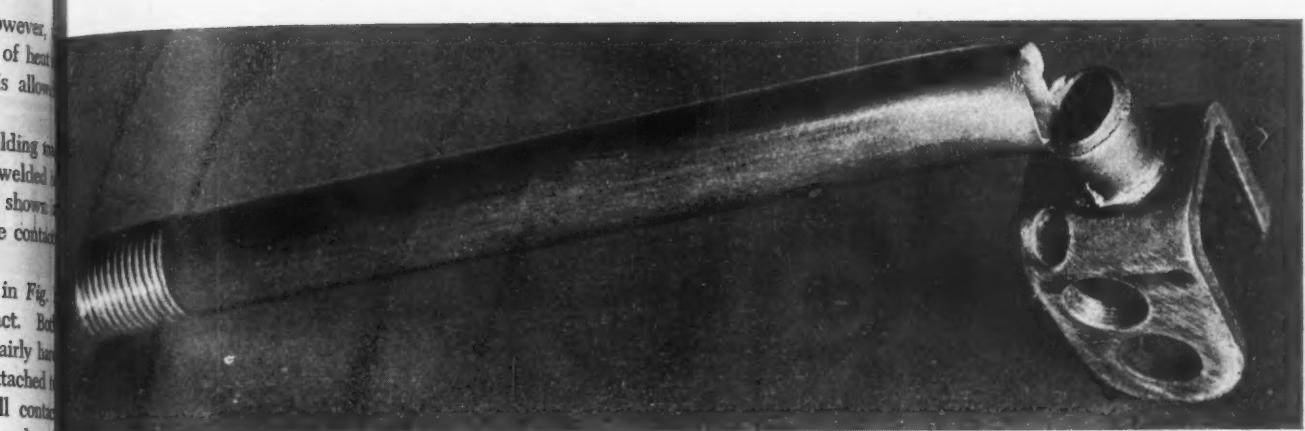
Above—Typical failure in a destructive test of resistance-welded handle.
